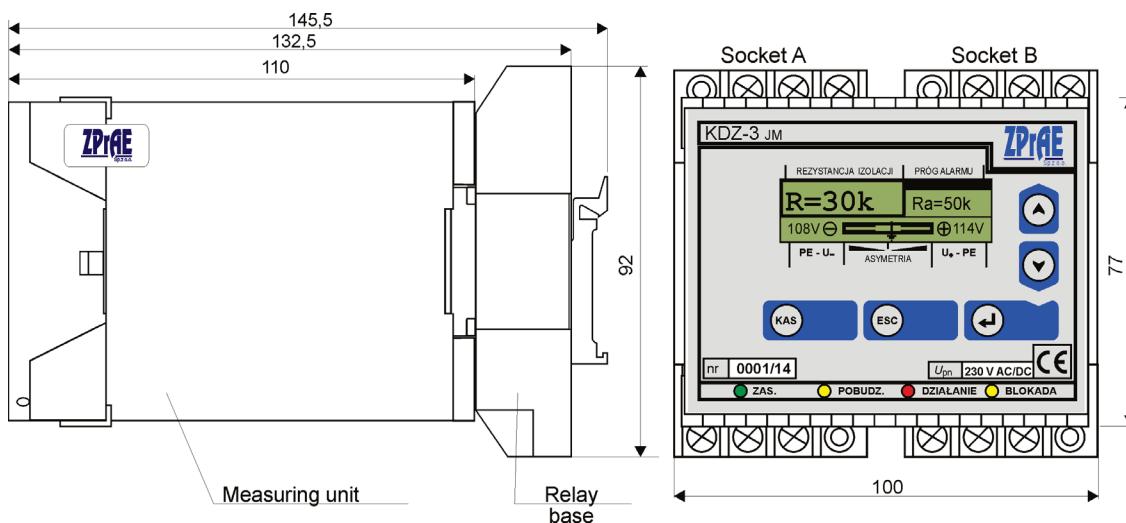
Dimension drawing of KDZ-3JM measuring unit.
